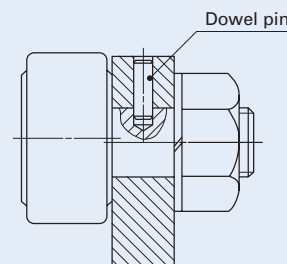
Mounting example of Solid Eccentric Stud Type Cam Follower
